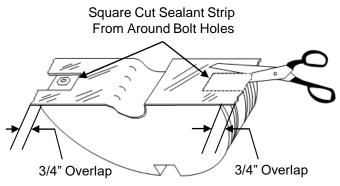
Applying LOCK-TAPE Sealant Strip to End Plate Sections
